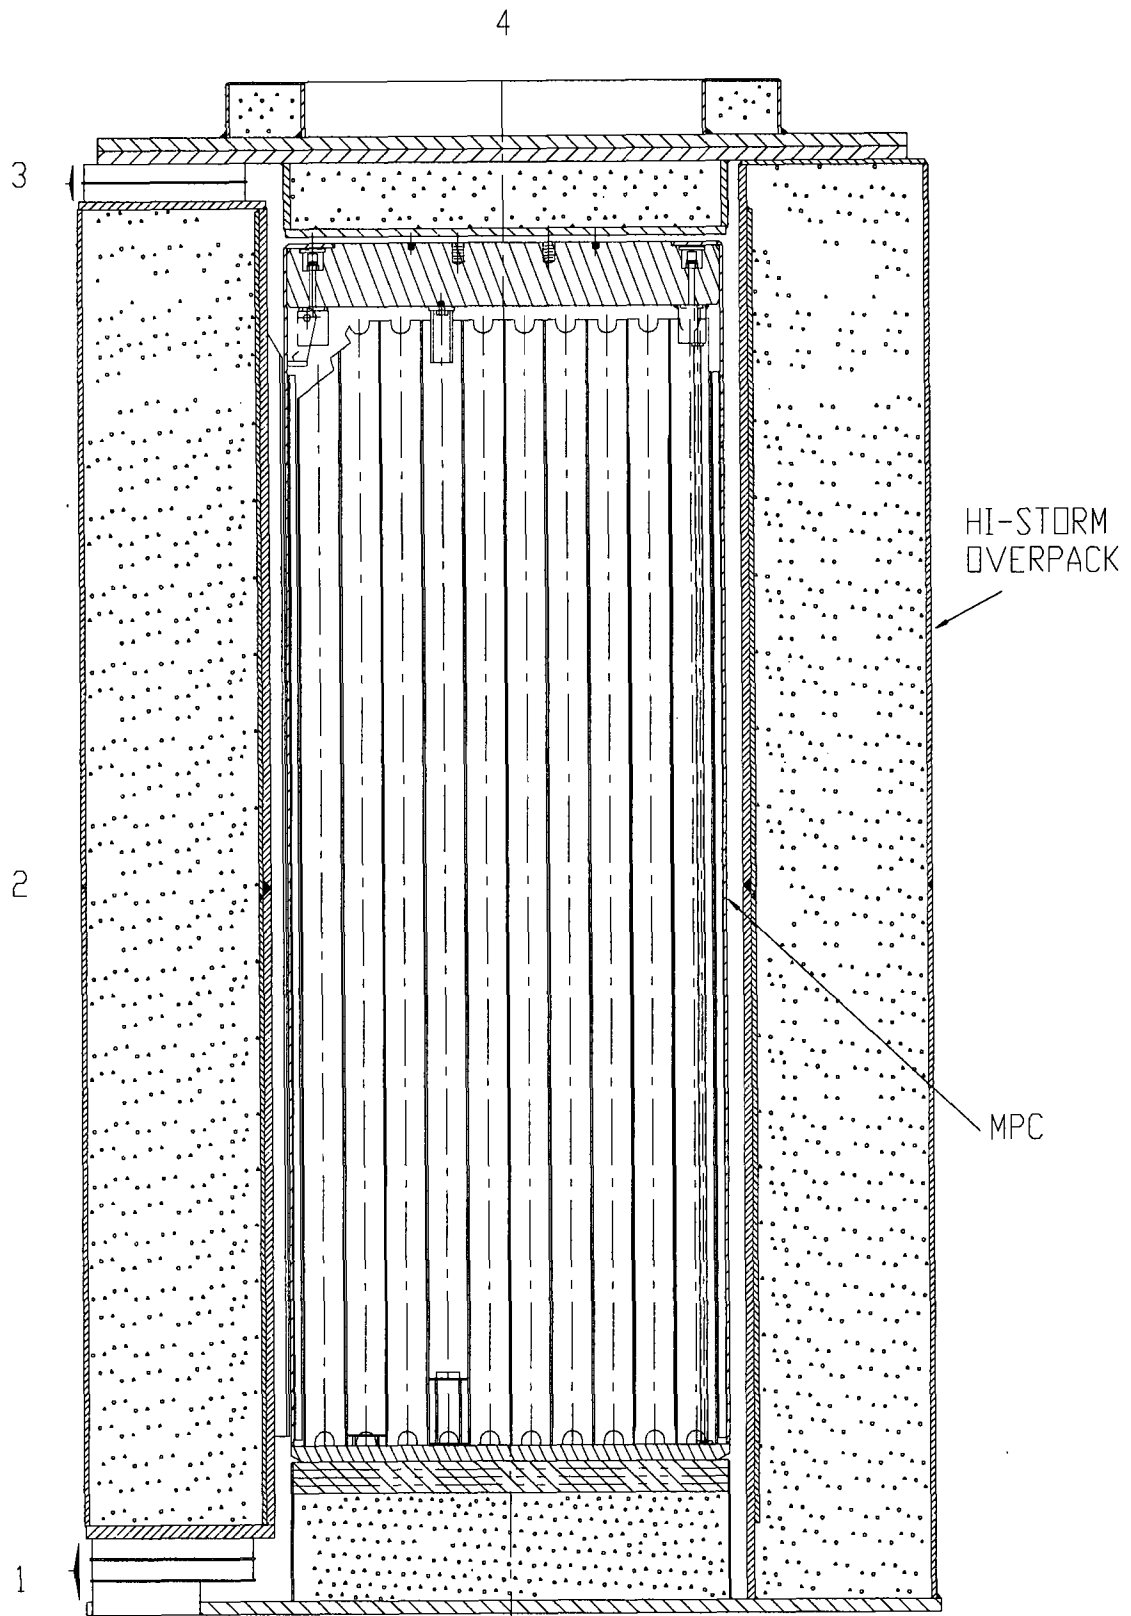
; CROSS SECTION ELEVATION VIEW OF HI-STORM 100 OVERPACK WITH DOSE POINT LOCATION
